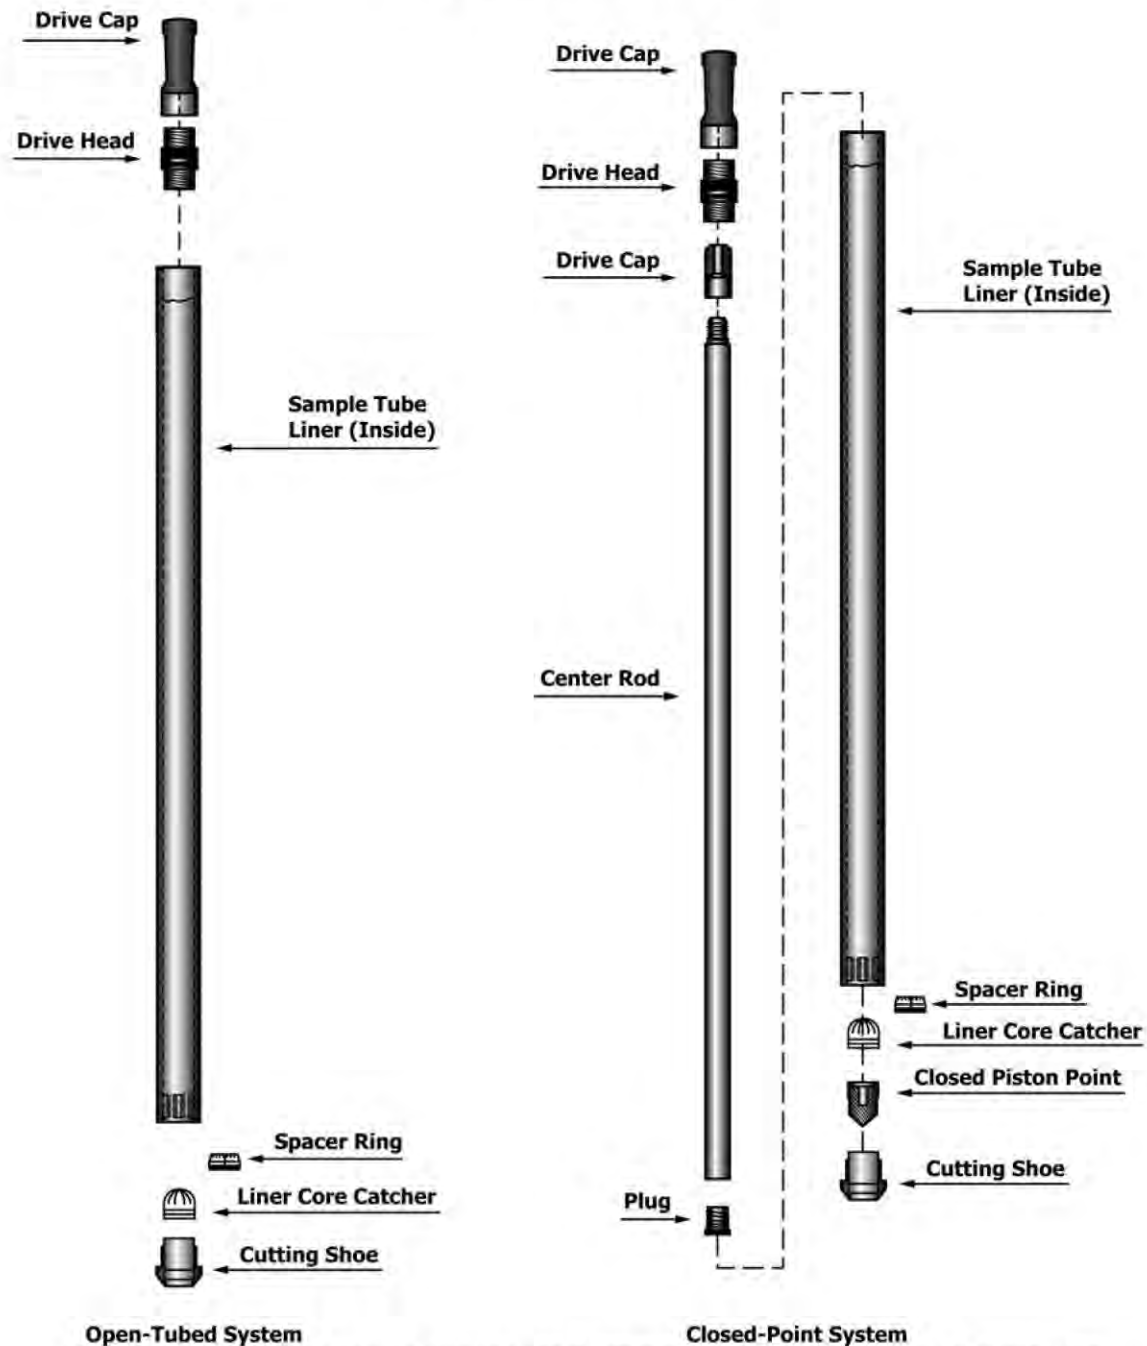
Typical Single Tube Sampling System Used in Either Open Tube or Sealed (Closed) Piston Point
